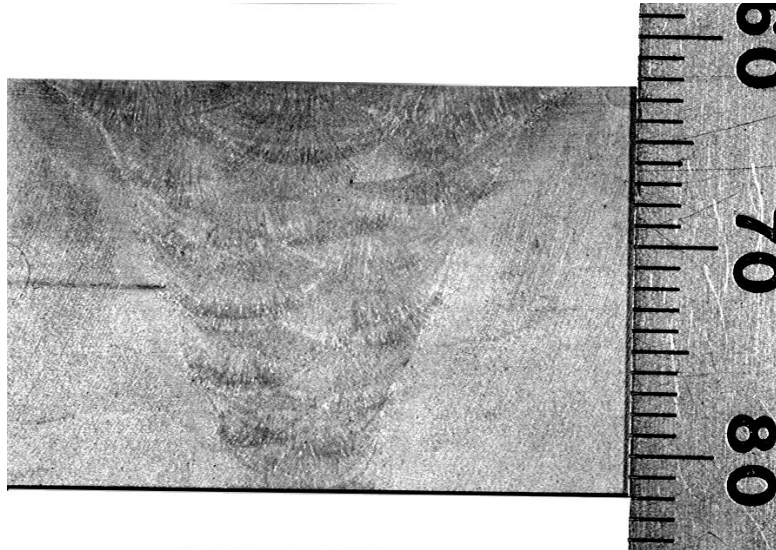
Macro-Section of the Multi-Pass Weld, after Removal of the Backing Bar and Cap Reinforcement
